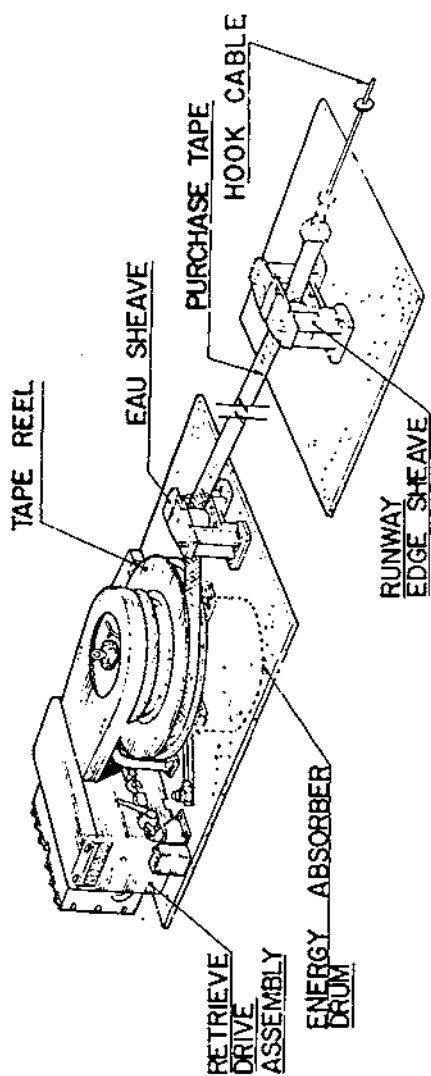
The basic parts of Rotary Hydraulic Arresting Gear.
